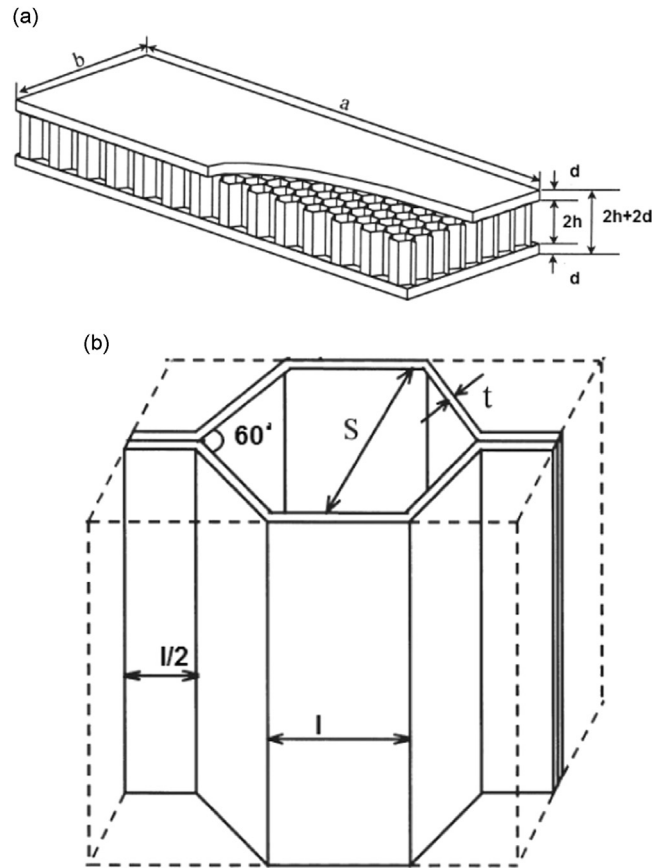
(a) Dimension of honeycomb core sandwich panel and (b) dimension of unit cell honeycomb core [3].
